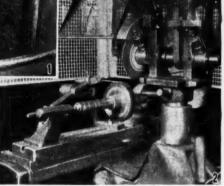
All crankshaft lathe tools are ground in this machine. Fig. 2.—Wornout slitting saws are reclaimed by recutting the teeth in the Cincinnati cutter grinder
